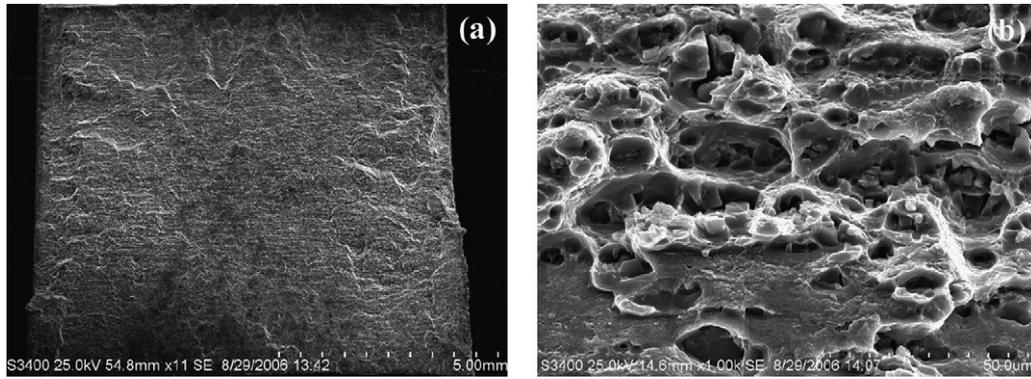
SEM micrographs showing fracture surfaces of as-FSW butt weld.
